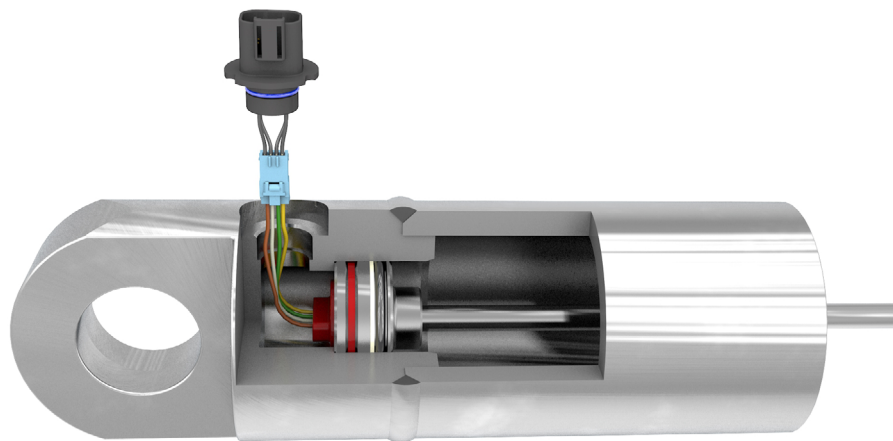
Mounting sensor with DT Connector – 1-piece version, part 1
